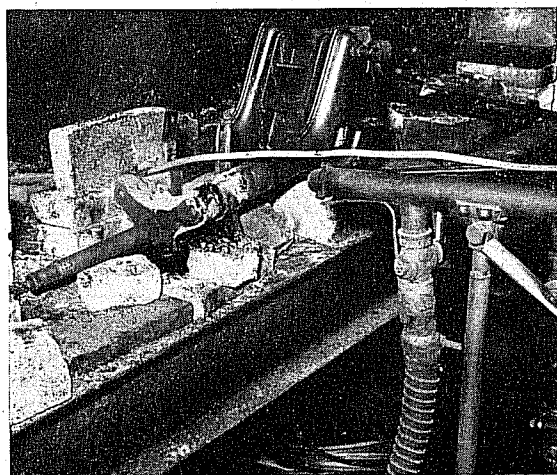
(above).—Machining steering head recess to take bearing cups. Location is from engine mounting bracket
